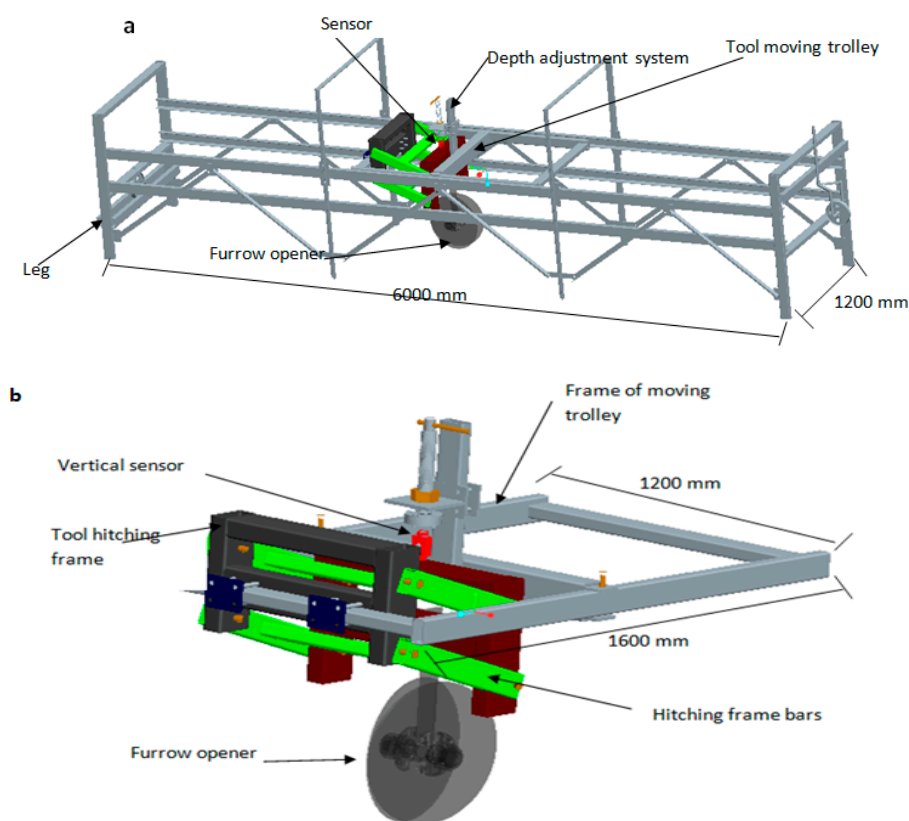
(a) ProE 3D view of test rig; (b) ProE 3D view of a furrow opener attached to a hitching frame and movable trolley.
